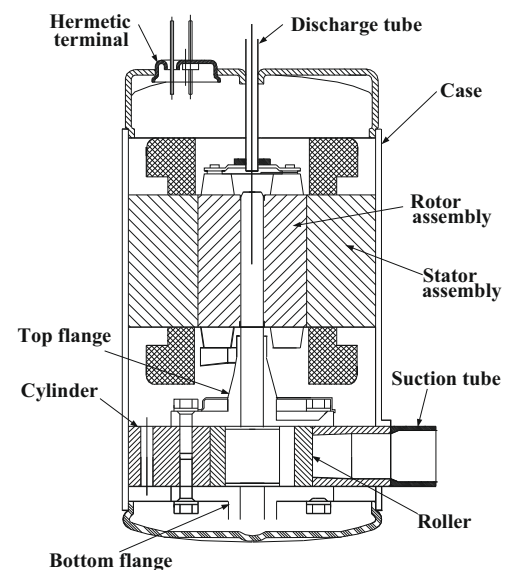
Schematic view of rolling piston type rotary compressor [1].
